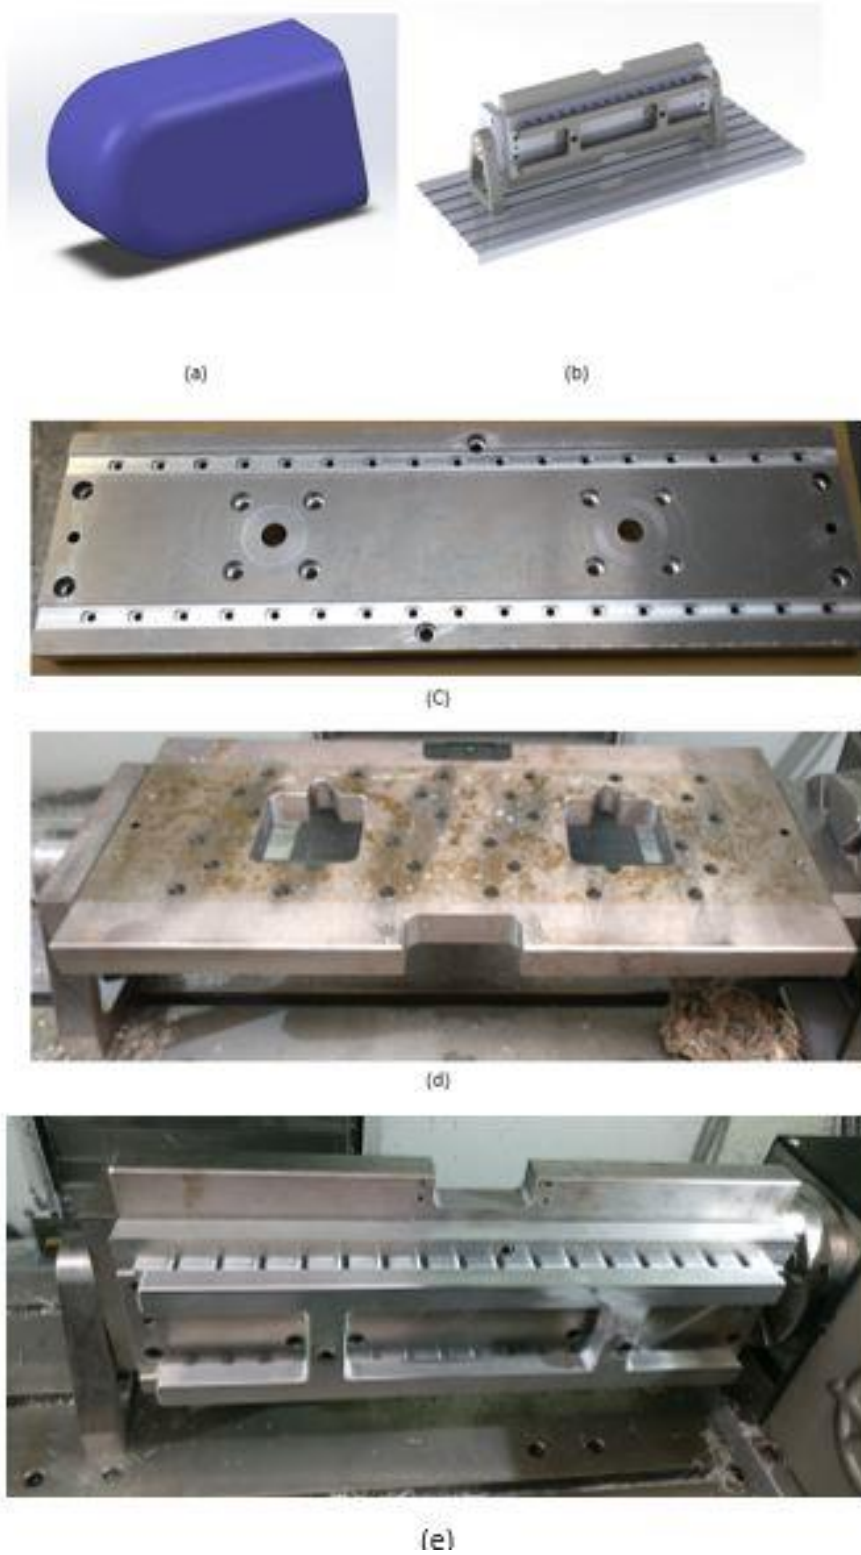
(a) The small part in 3D CAD (b) Full assembly rendered in SolidWorks (c) Machined the main plate of the dimensions of the main plate for Winding Cone_1 (d) Skeleton of the jig modified to machine the small part (e) Working jig for machining the small part.
